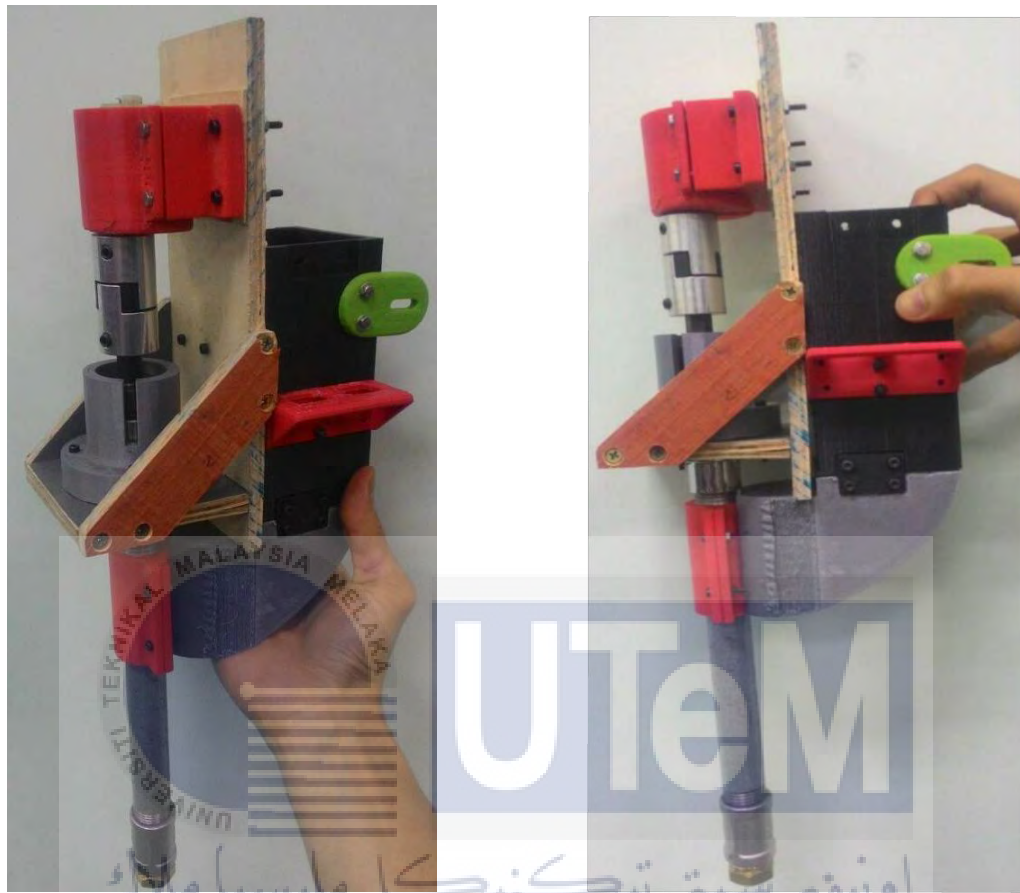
Full assembly of the 3D printer recycle machine.
